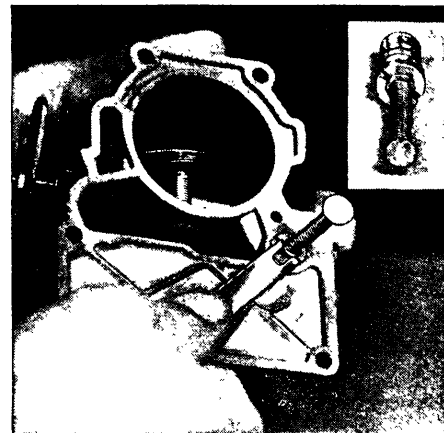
Remove vacuum piston (use t ol T-24733). If carburetor has aut matic choke, remove the parts before proc eding
